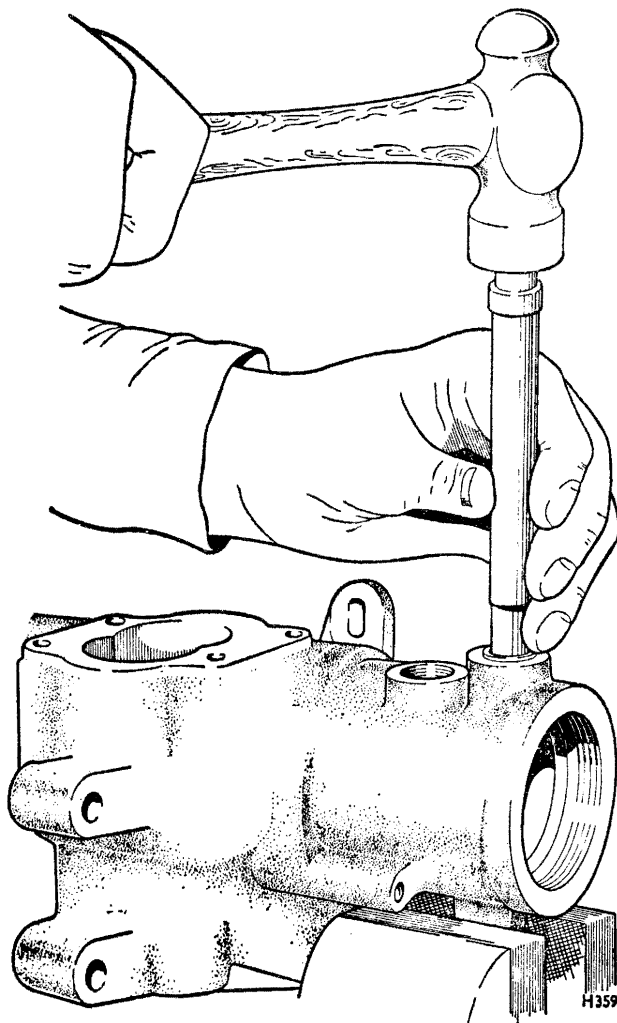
INSTALLING HOSE CONNECTOR SEAT
